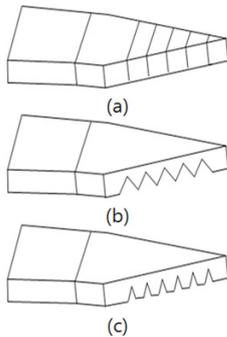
Design concept of non-scallop T-bar joint welding
